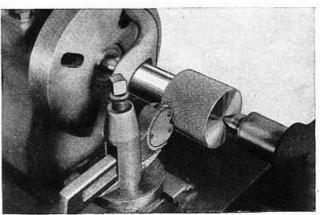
Knurling a Large Handle Held Between Centers on a South Bend Lathe
